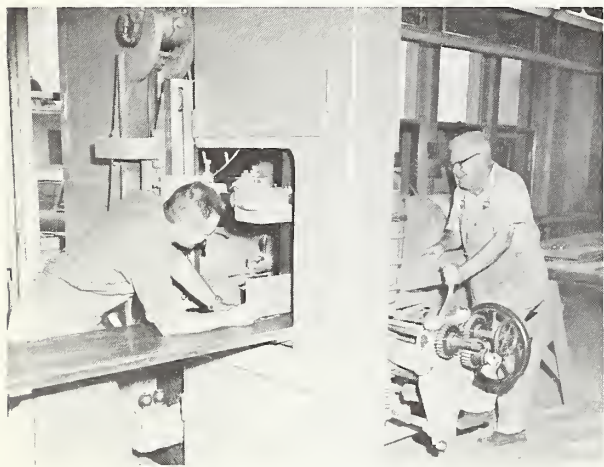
Resawing rough 4/4 lumber into face boards. The saw was set to produce face boards with 7/16-inch thickness. This was necessary to provide for planing a smooth gluing surface, and having a final uniform thickness of 3/8 inch for all face boards.
